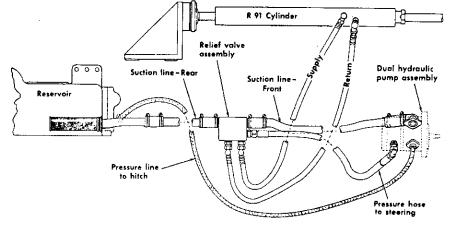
View showing general arrangement of power steering components used on all Series 354, 364, 384 and Series B-414 S/N 21196 and later. On tractors equipped with R92 cylinder, supply and return hoses are connected to cylinder in reverse of connections shown.
